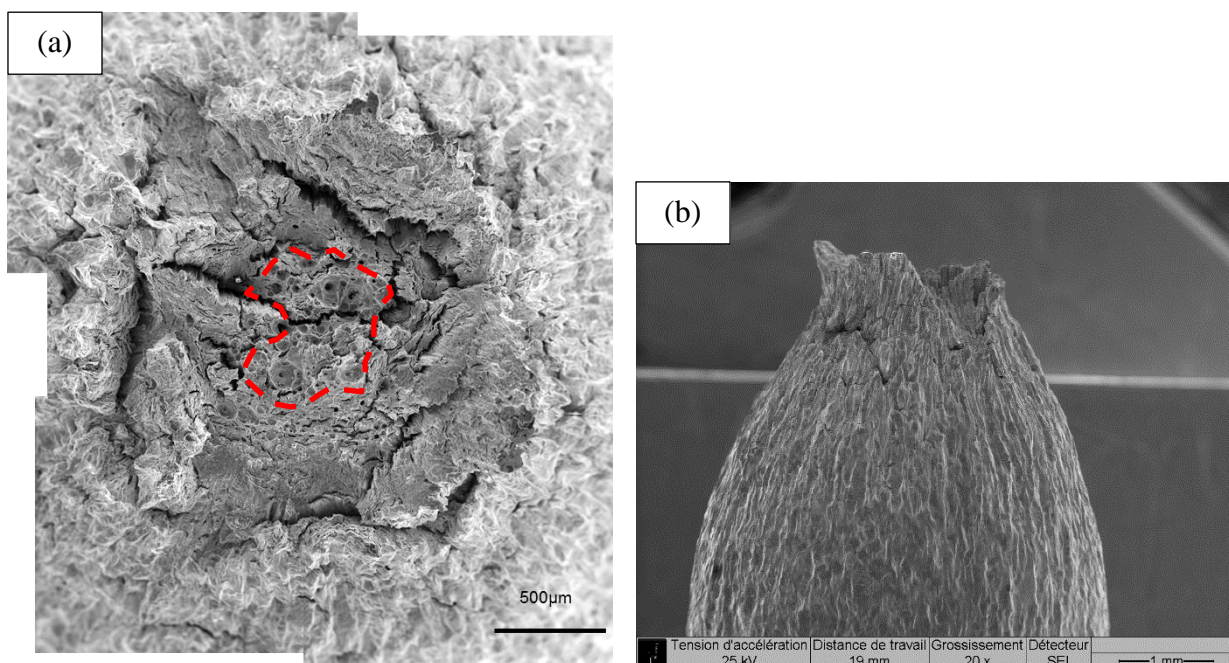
31 SEM images of the fracture surface (a) and the side view of fracture part (b) of the specimen tested under hydrogen with exposure time $t_e = 5340$ minutes (FCS9).
